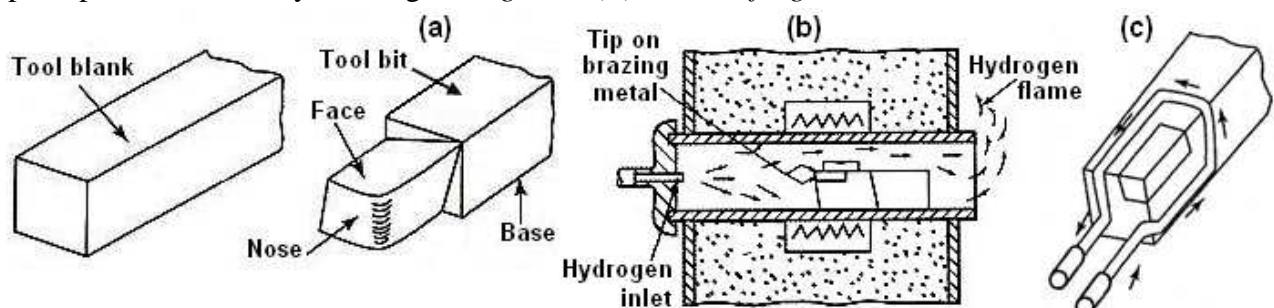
(a) Forged tool (b) Furnace brazing of a tool tip (c) Induction brazing of a tool tip
